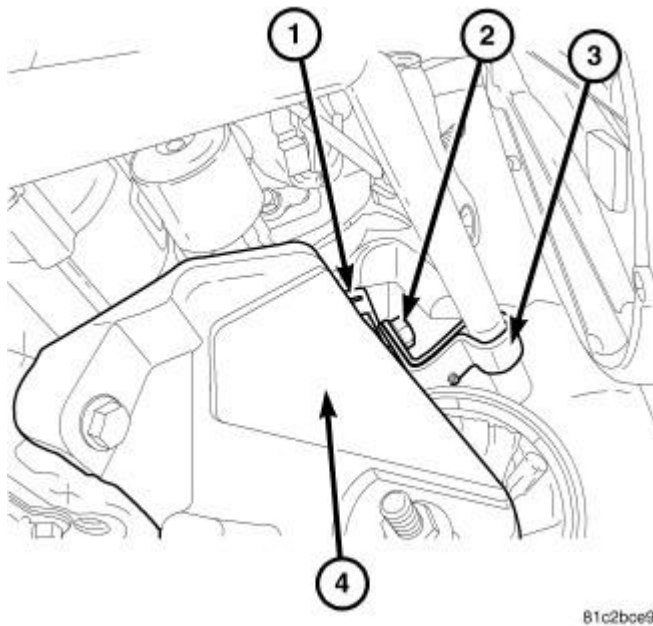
Ground Cable, Bolt, Heater Tube Bracket & Front Mount
